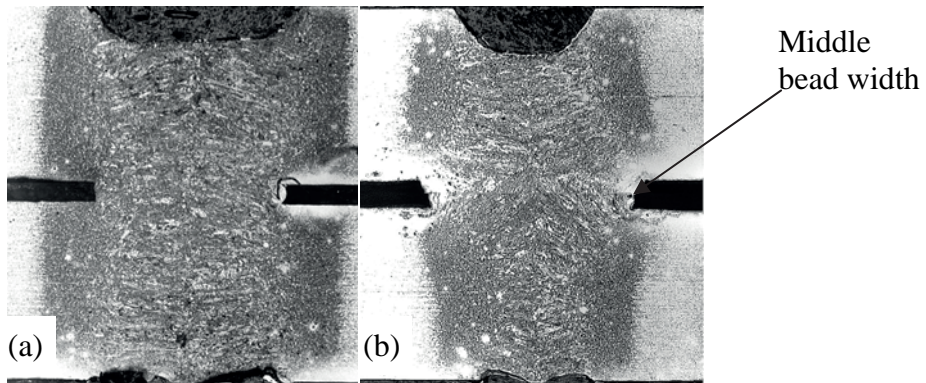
17 weld cross section corresponds to the welding speed 2.4m/min (a) and 4.5m/min (b)
